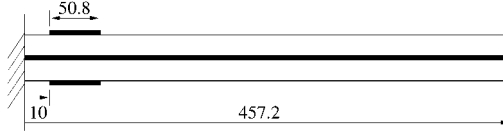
Cantilever sandwich beam with bonded actuators (dimensions in mm).
